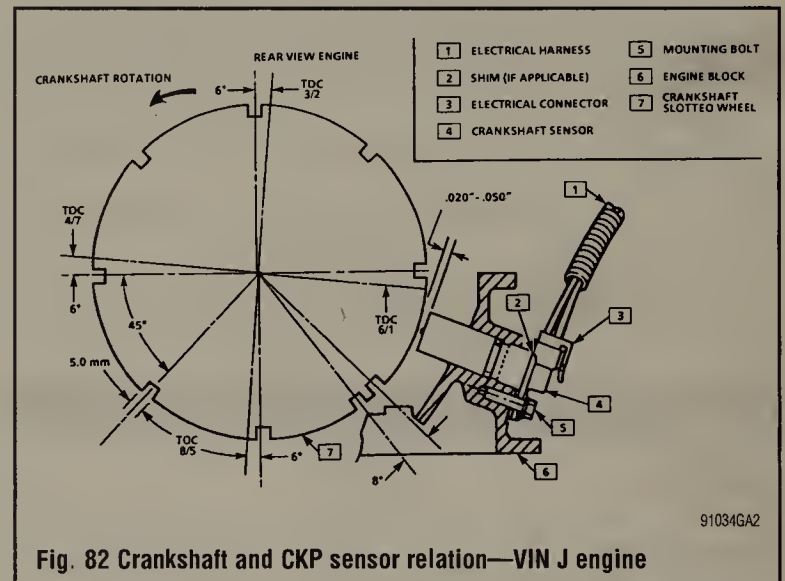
Crankshaft and CKP sensor relation—VIN J engine
